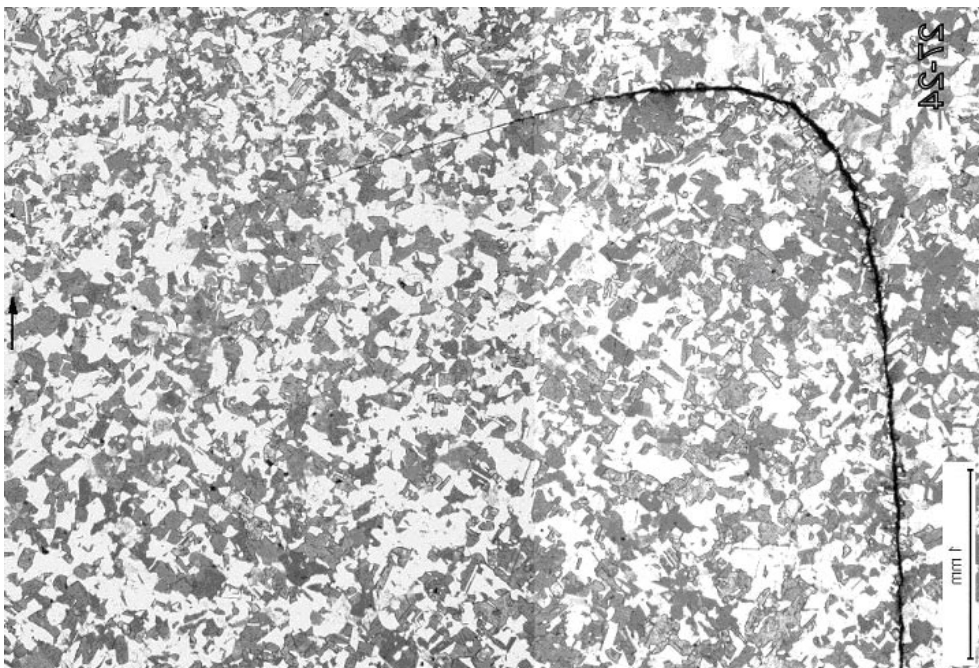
Macrograph of the joint line hooking in weld FSW27.
